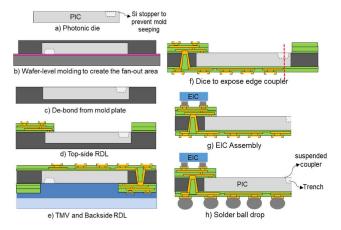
Process flow to integrate the optical engine package with PIC embedded in the mold with edge optical coupling and EIC flip-chipped on its surface.
